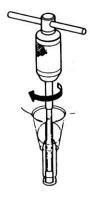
Valve Guide Reamer 6.6 mm (0.2598 in.)
